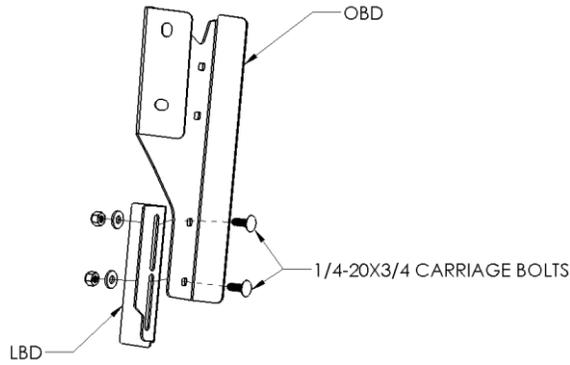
Outer bracket sub-assembly, driver side shown
